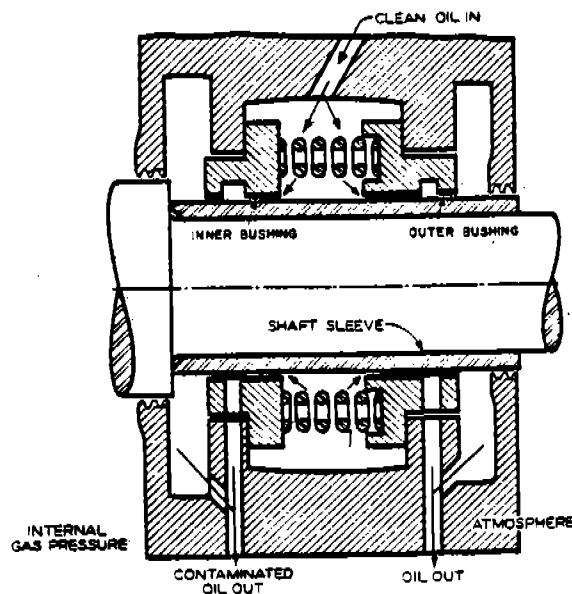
Liquid-film Compressor Shaft Seal with Cylindrical Bushing.
